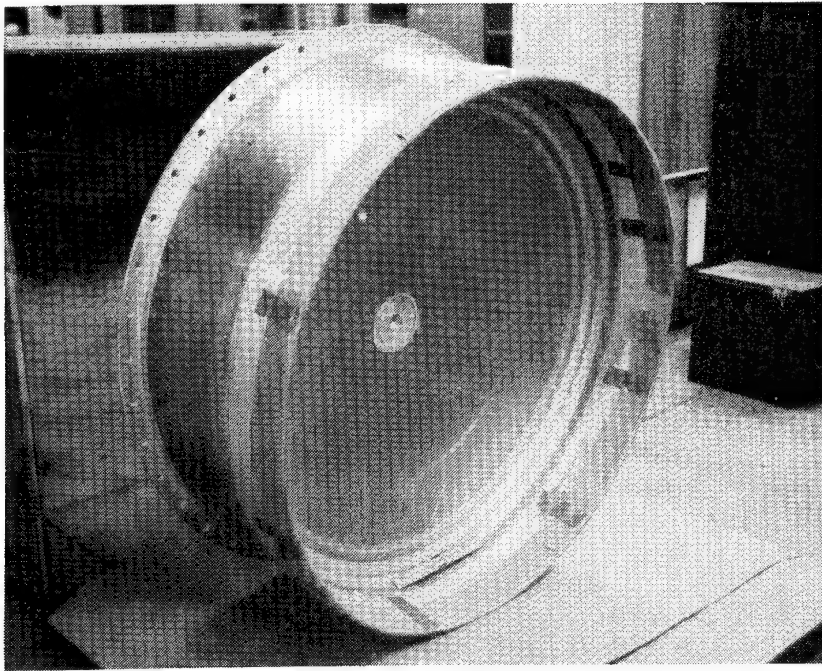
Bottom End Closure Assembly 6061 Aluminum Head
